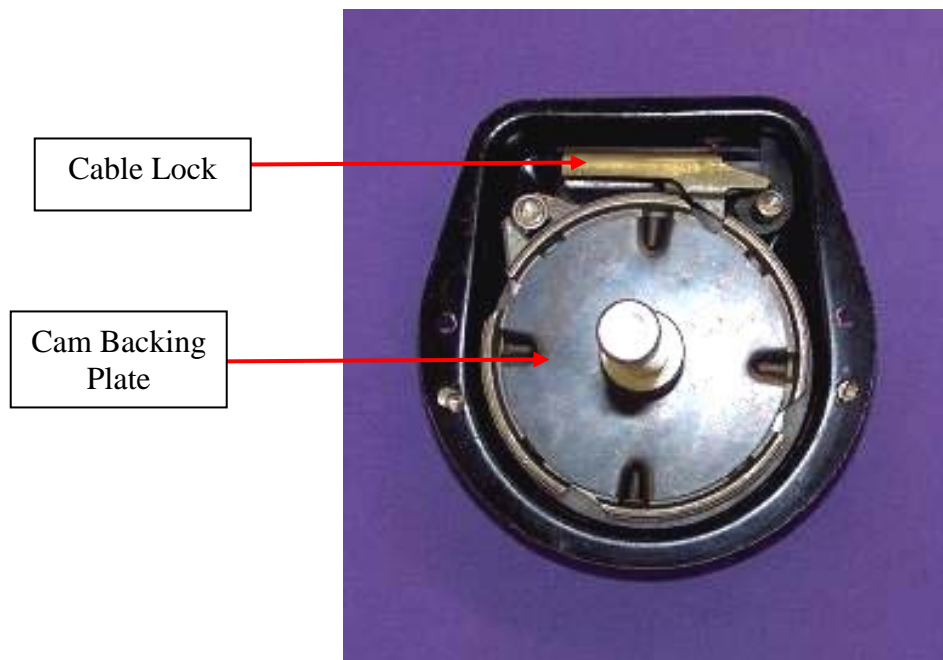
Cover and Inner Gear Assembly (Removed from Main Assembly)
